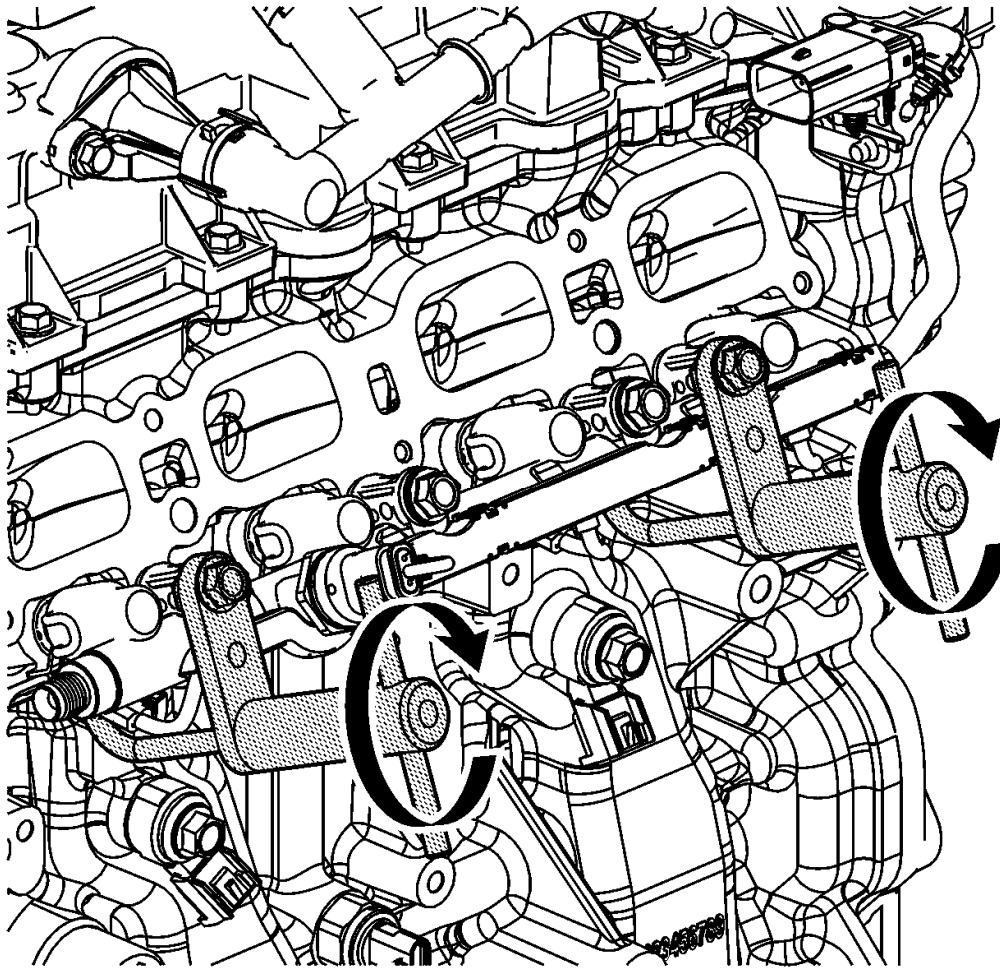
Fuel Rail Assembly Using Fuel Rail Assembly Remover
